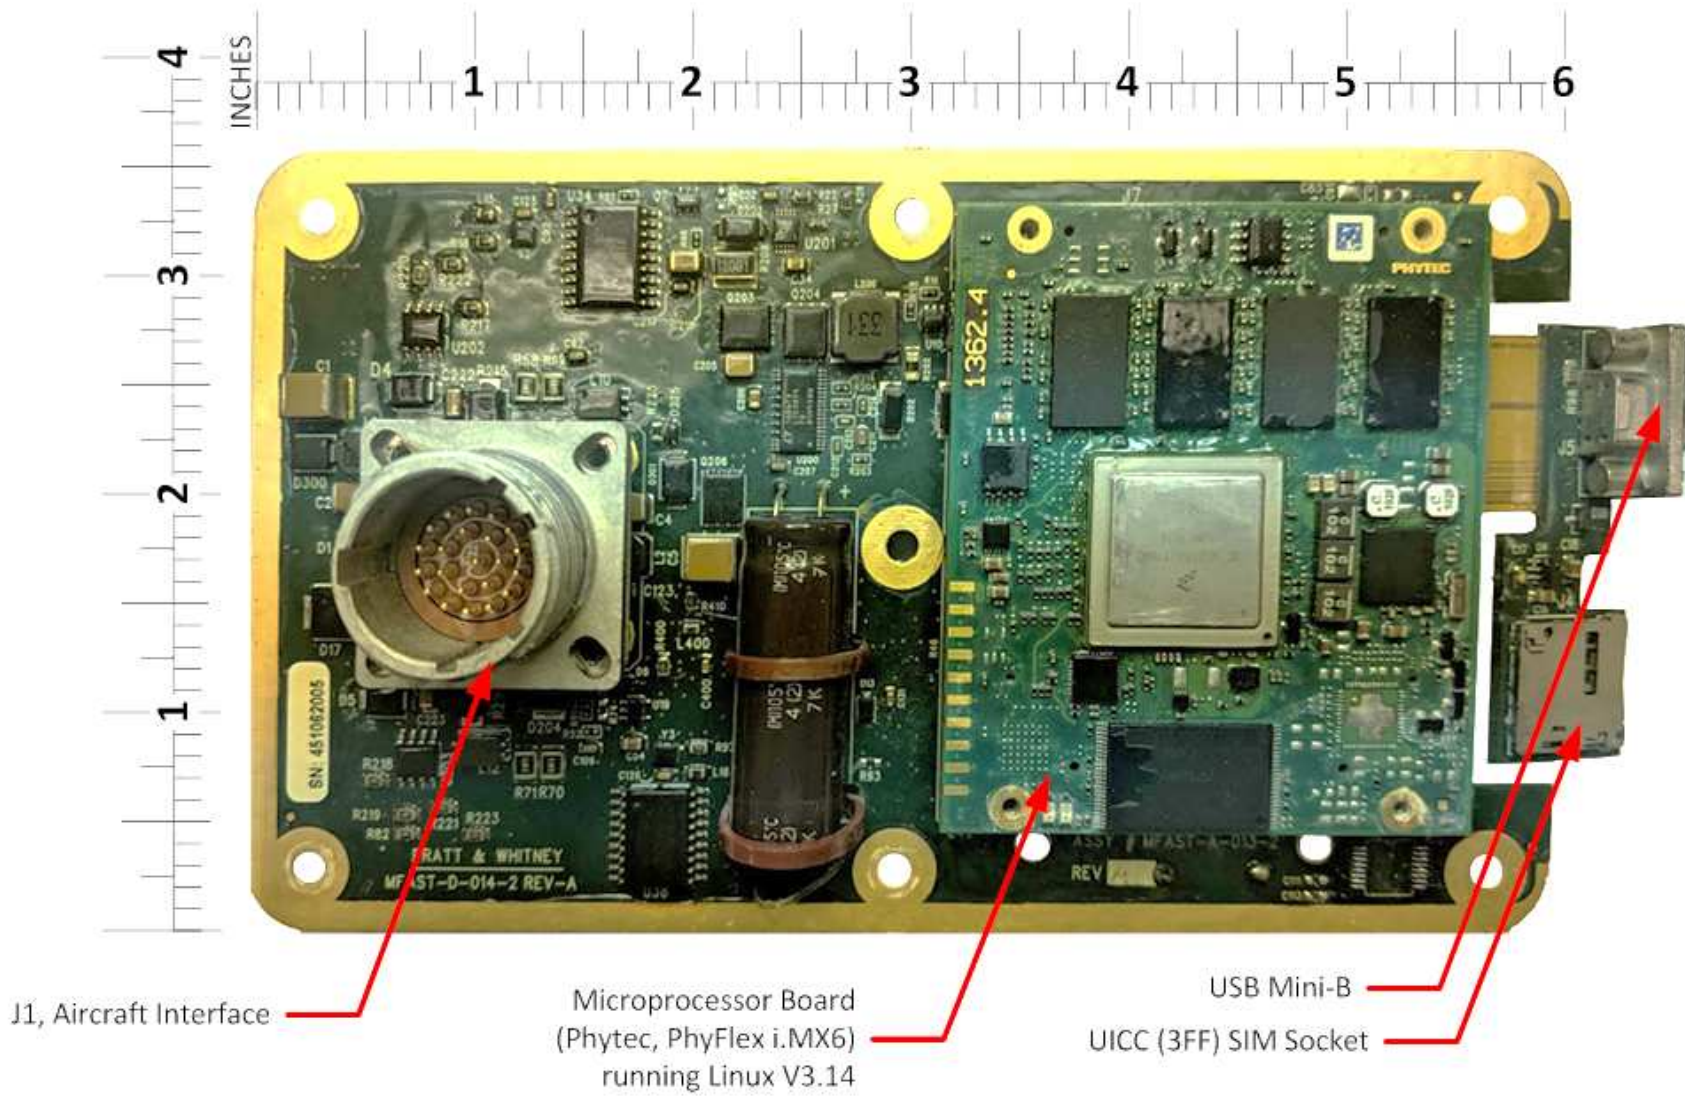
MFAST-A-010-2 / DCTU - Full internal assembly with cable interconnects
